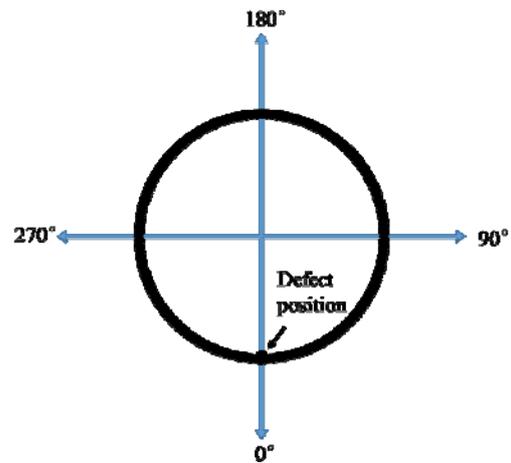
FIGURE VI. POSITION OF WELD DEFECT.
